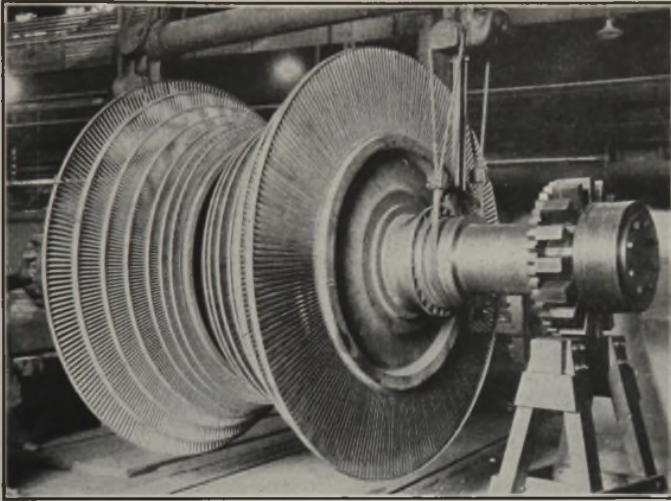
Rotor, or spindle, 65,000-kw Allis-Chalmers turbine.
